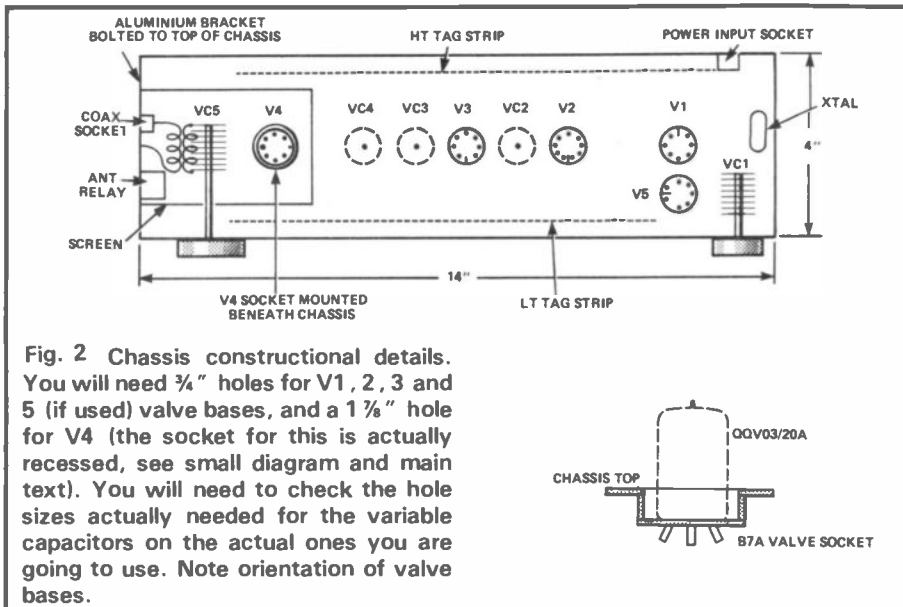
Chassis constructional details. You will need $\frac{3}{4}$ " holes for V1, 2, 3 and 5 (if used) valve bases, and a $1\frac{1}{8}$ " hole for V4 (the socket for this is actually recessed, see small diagram and main text). You will need to check the hole sizes actually needed for the variable capacitors on the actual ones you are going to use. Note orientation of valve bases.
